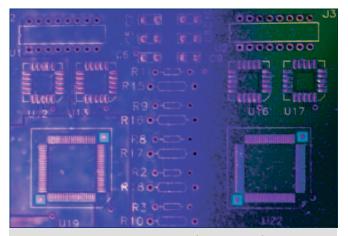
UV inspection reveals uncoated PCB areas
